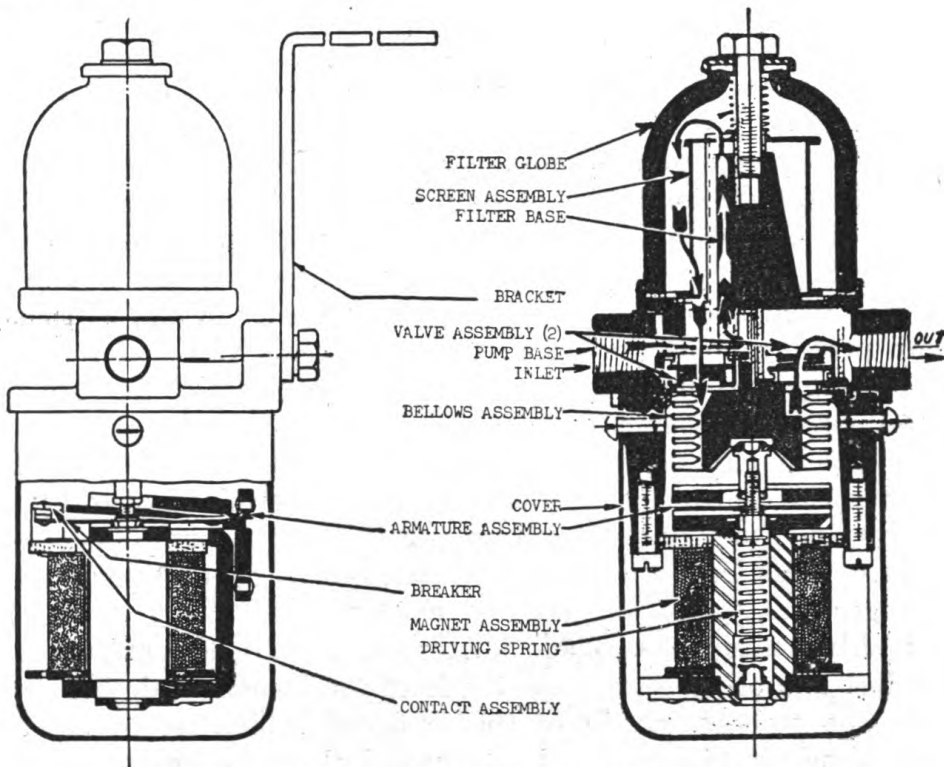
Electric impulse fuel pump with built-in fuel filter.
